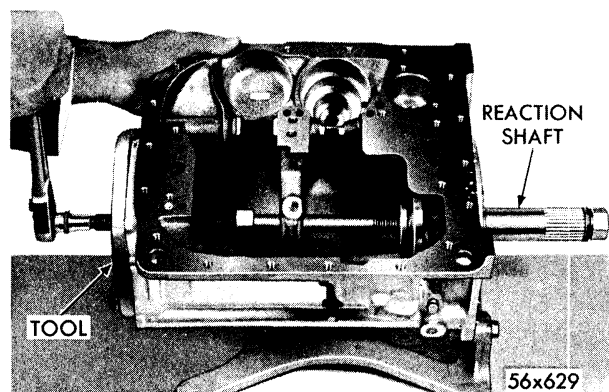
Removal and Installation of Torque Converter Reaction Shaft
